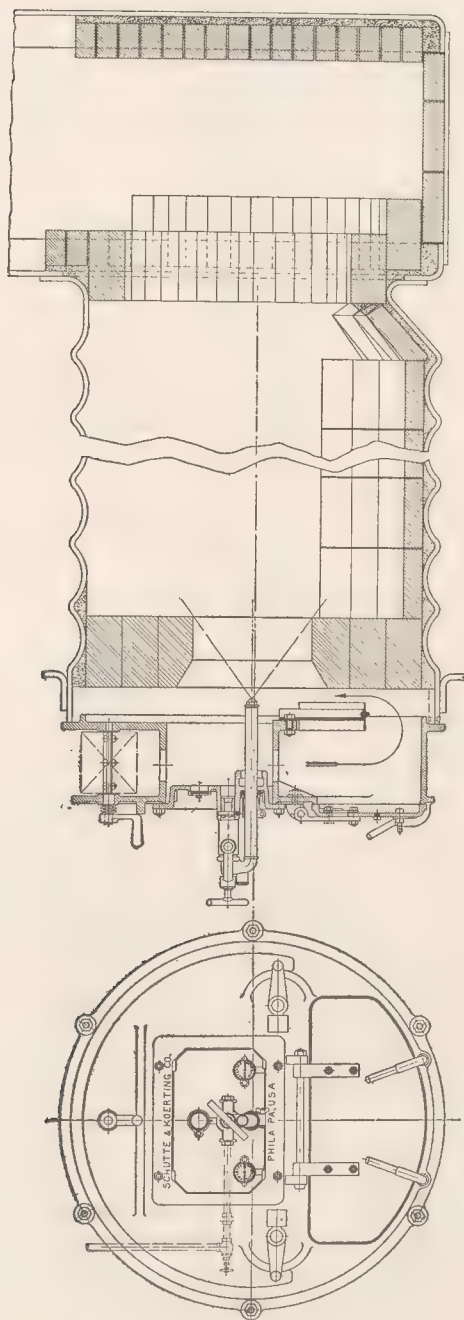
B. Schutte & Koerting Burner Fitted to Scotch Boiler.
